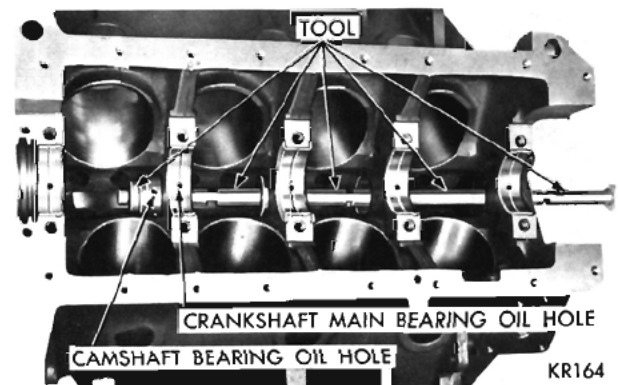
Removing Camshaft Bearing Using Tool C-3132A
